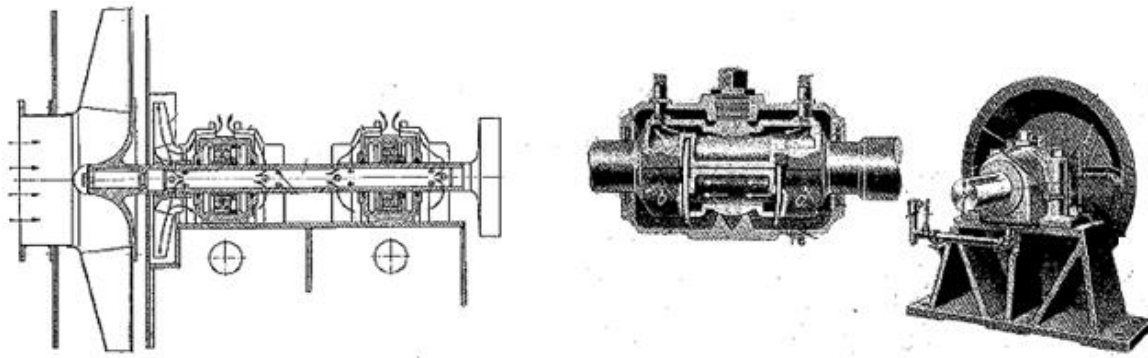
, Devices used to reduce heat in shaft bearings [5]
